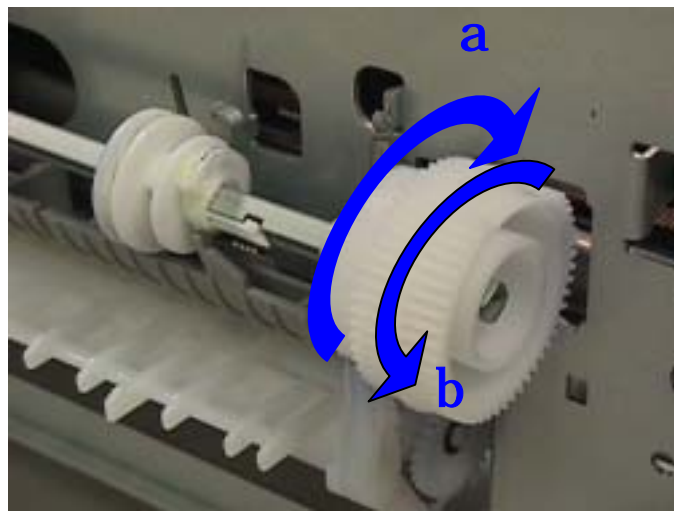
Positioning in LIFT CAM SHAFT ASS'Y adjustment 2
